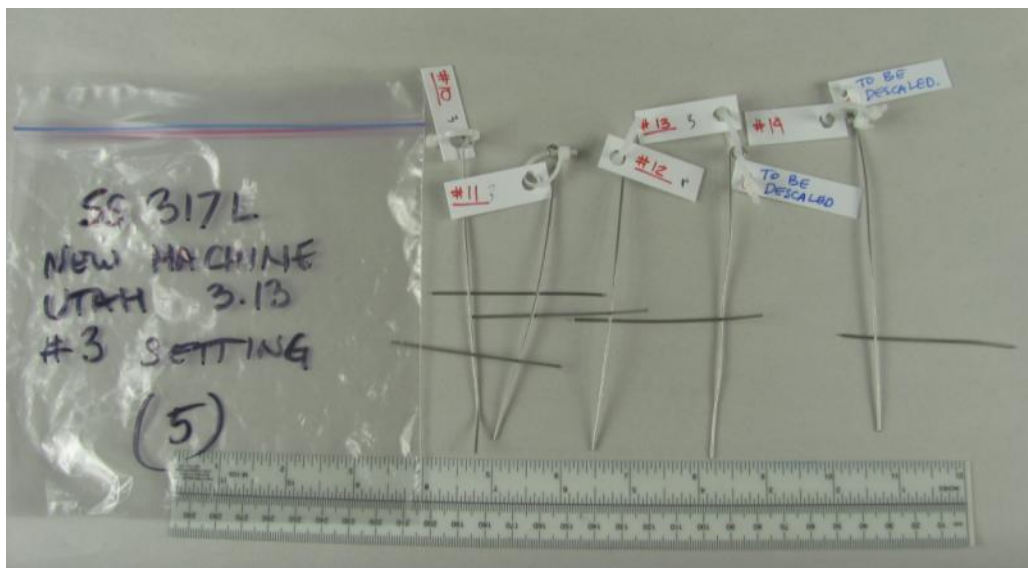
Macro photographs showing the as-received Type 317L solid wire weld samples submitted for evaluation (prior to descale / passivation and salt spray testing). Samples #10, #11, #12, #13 and #14 are shown.
